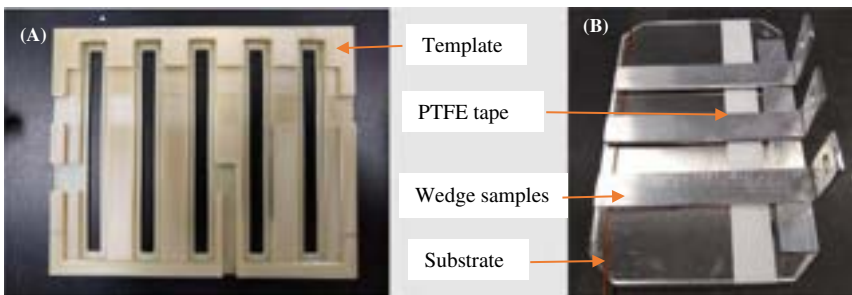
(A) 3D printed template for the wedge test assembly using an HT approach; (B) Representative plaque with three out of a possible five wedge test samples already dispensed and assembled.
